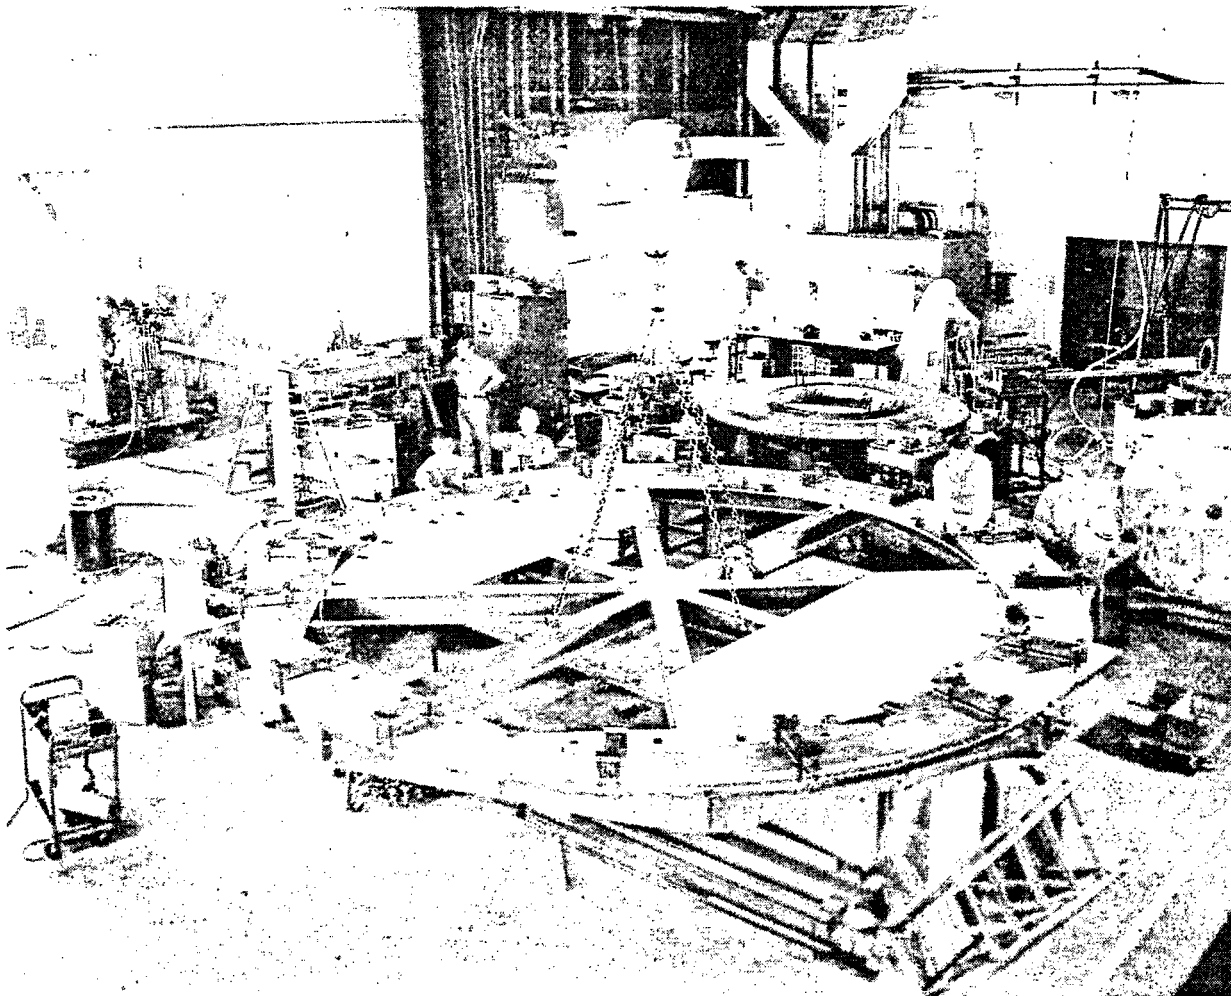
A general view of the magnet winding facility showing a single pancake of the 1.8 T, 4.8 m i.d. bubble chamber coil in position on its winding jig.
